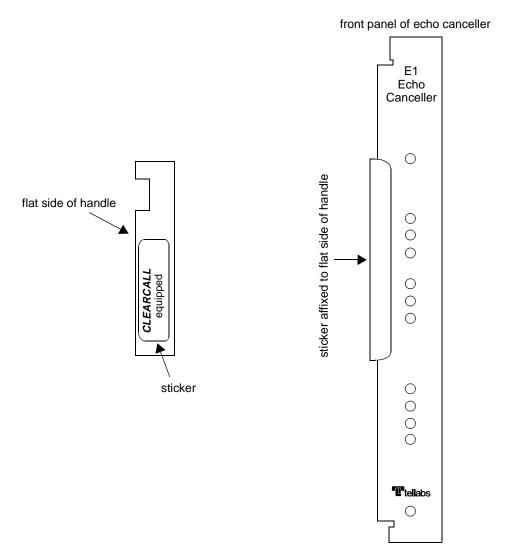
CLEARCALL sticker placement on front panel handle of echo canceller
